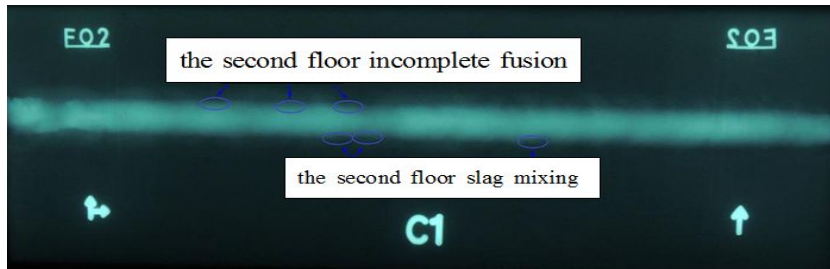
X-ray radiographic test film of shielding gas CO<sub>2</sub> 100% welding specimen by opening angle 40°
